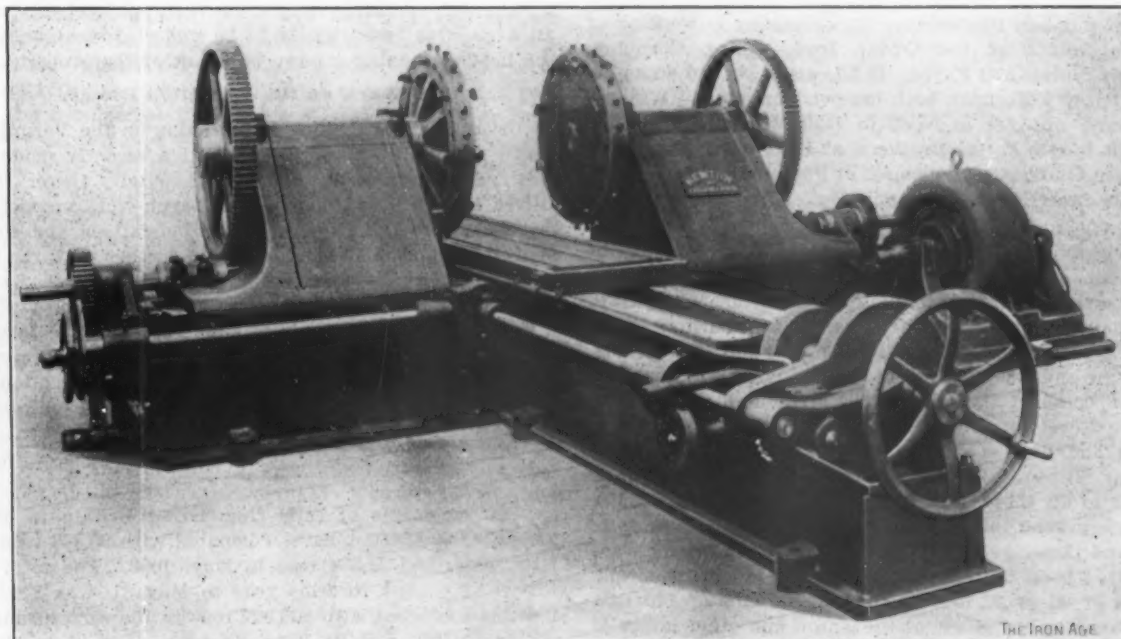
A Special Milling Machine, Built for the Pittsburgh Reduction Company by the Newton Machine Tool Works.
